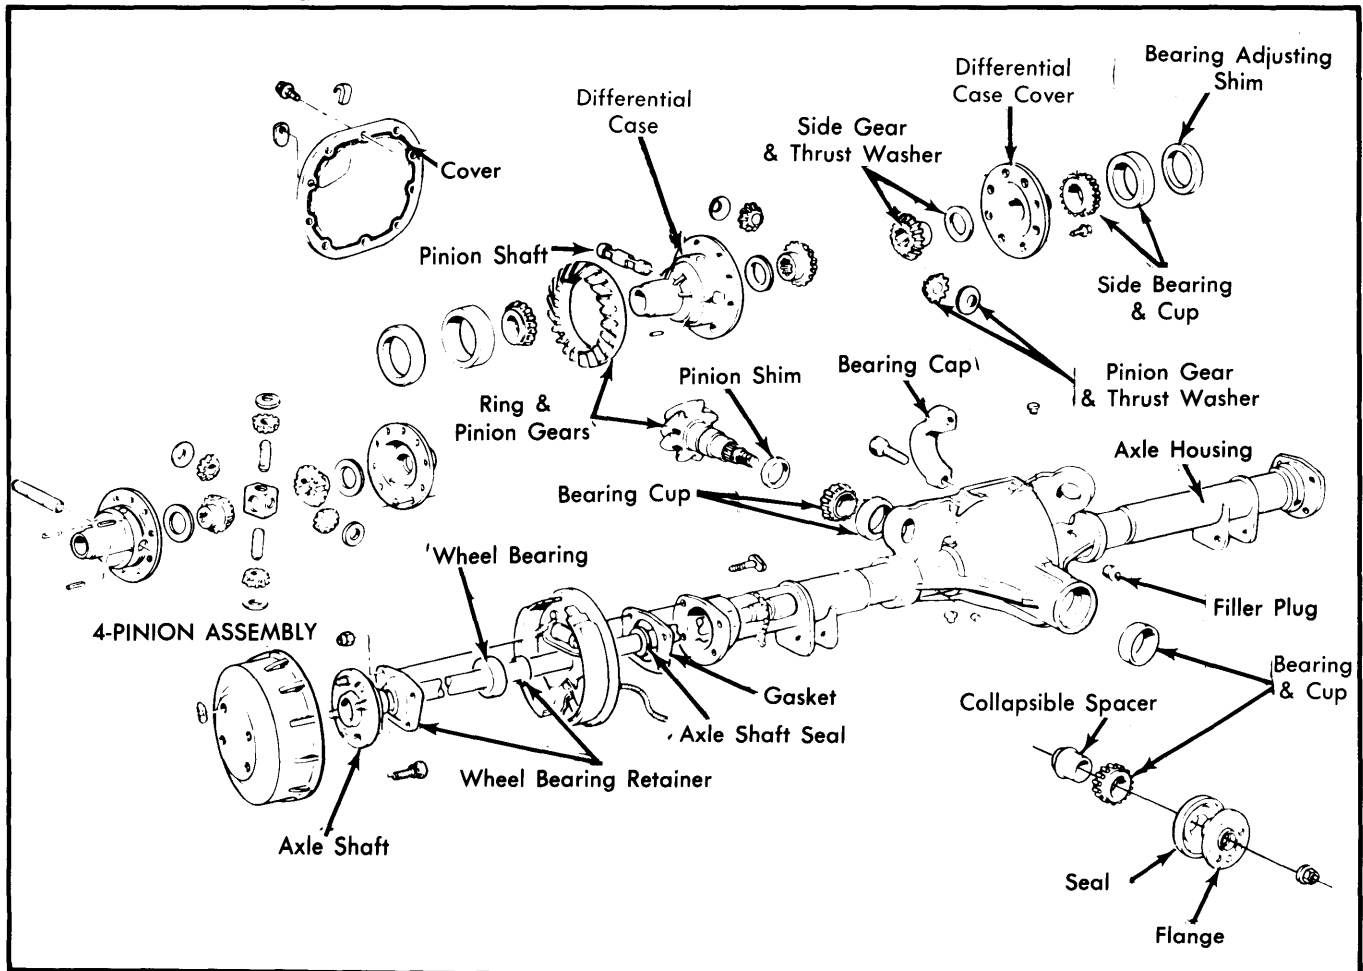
Exploded View of Ford Motor Co. 6 3/4" Integral Housing Axle Assembly
